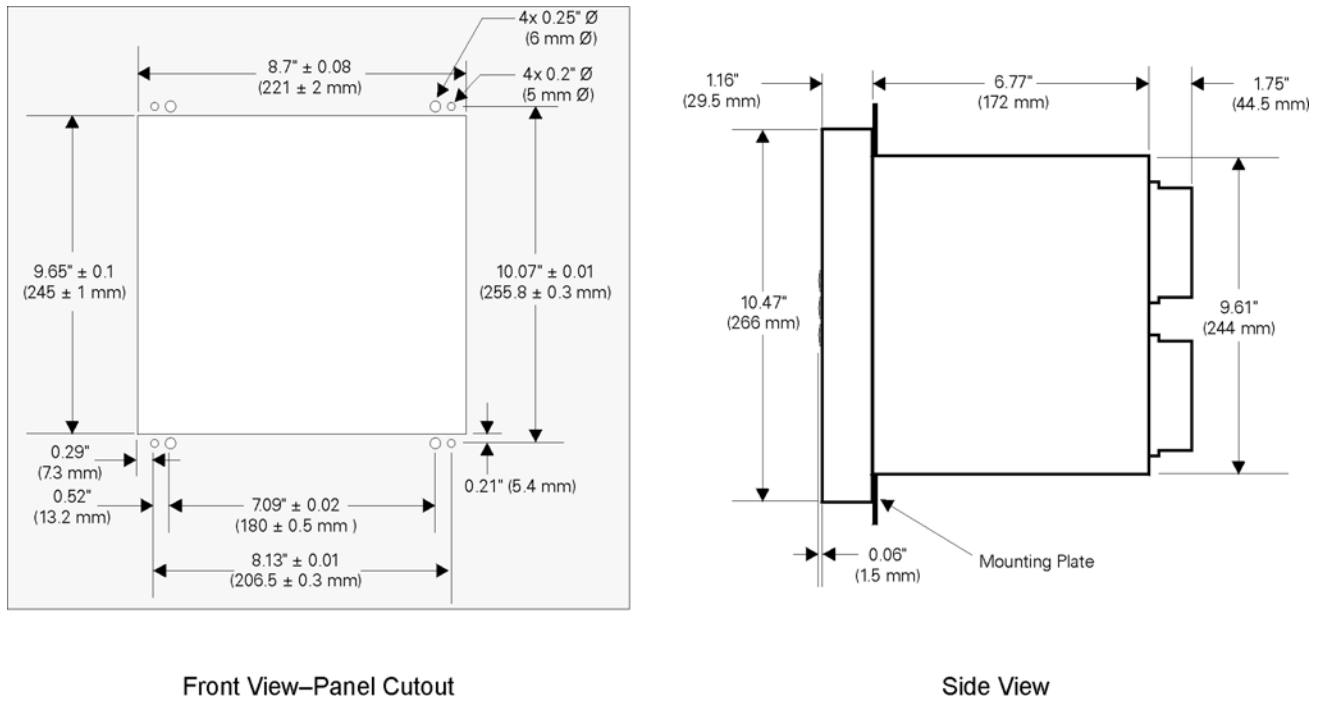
Dimensions of Case and Panel Cutout for a 7UT513 Relay
